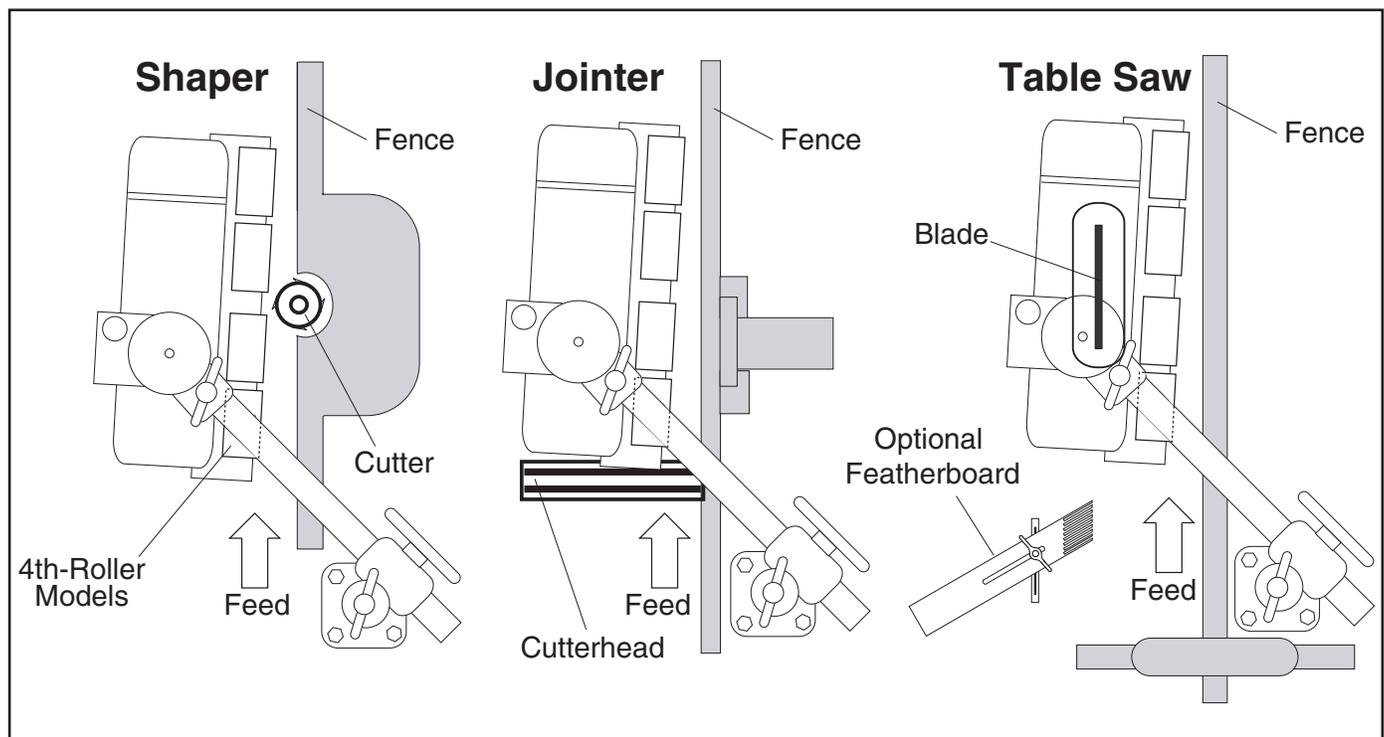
Typical power feed mounting on a shaper, jointer, and table saw.
